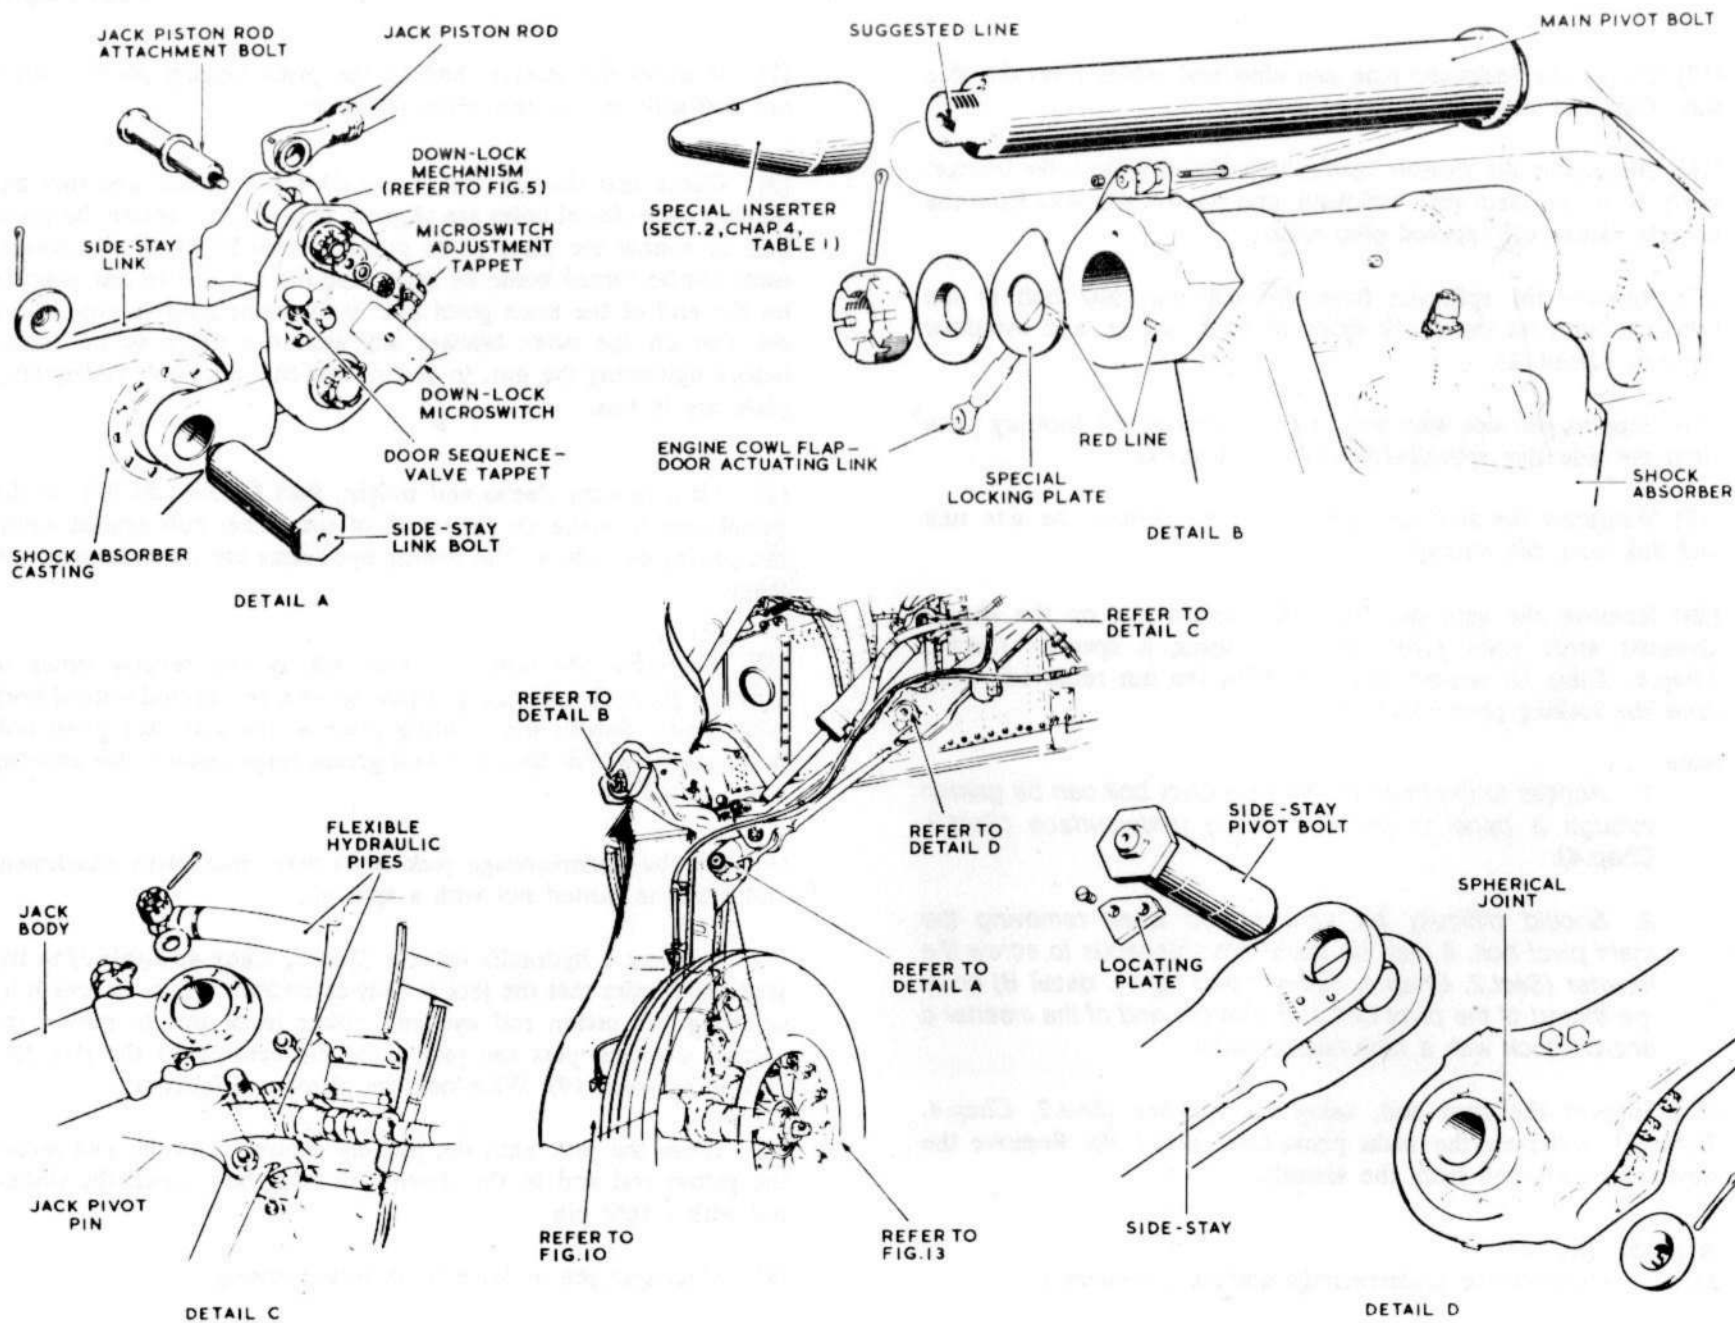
UNDERCARRIAGE — REMOVAL AND ASSEMBLY
